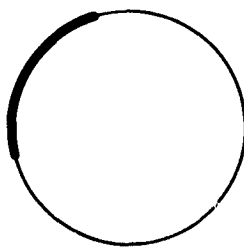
Teardown Wear Patterns (Rear View); Twelfth-Stage High-Pressure Compressor Outer and Inner Air Seals. (J23976-12)
